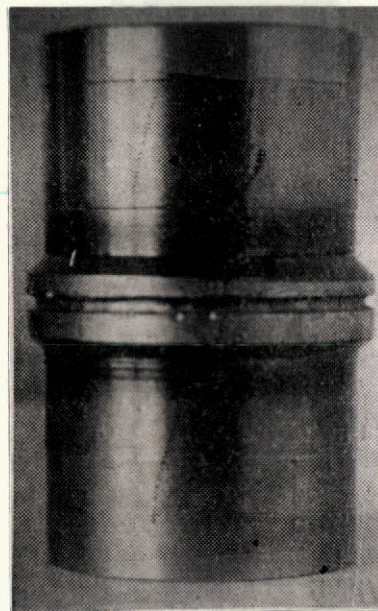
External view of brazed Cr18Ni10Ti alloy joint (PsrMNTs-38 brazing solder, radiation 0.03 W/cm^2).
